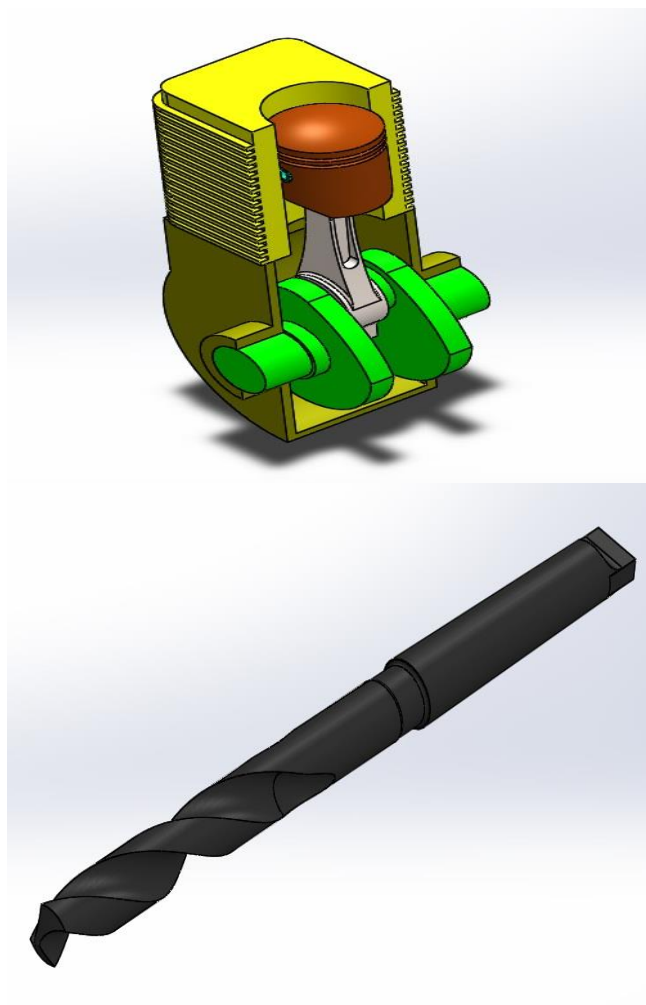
The 3D model of a one cylinder engine assembly and a drill bit made with the use of Solidwork
